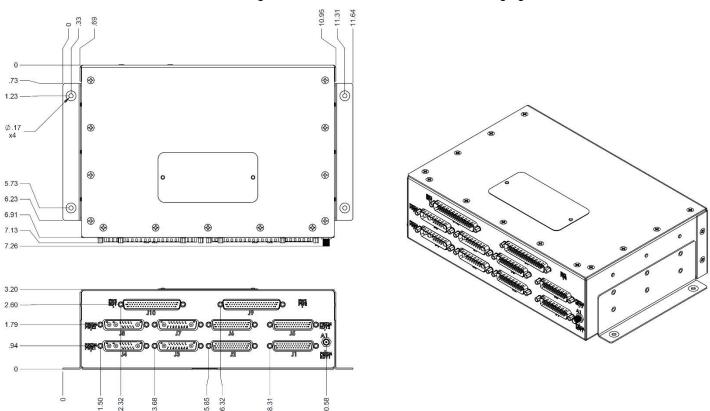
PRIZM -54 Dimensions and Mounting Dimensions
